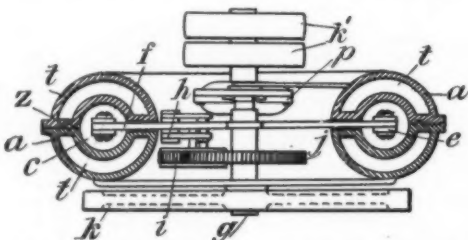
HORIZONTAL SECTION THROUGH MOTOR.
